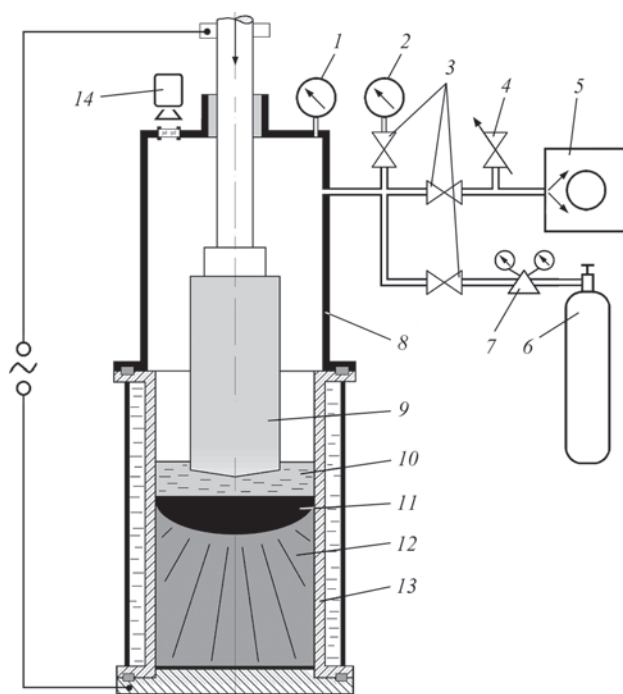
Schematic of the experimental installation for the ESR in a vacuum condition: 1 — vacuum/pressure gauge; 2 — ionization vacuum gauge; 3 — vacuum valves; 4 — inlet valve; 5 — vacuum pump; 6 — argon cylinder; 7 — pressure regulator with rotameter; 8 — furnace chamber; 9 — consumable electrode; 10 — slag pool; 11 — metal pool; 12 — ingot; 13 — water-cooled mould; 14 — camcorder
